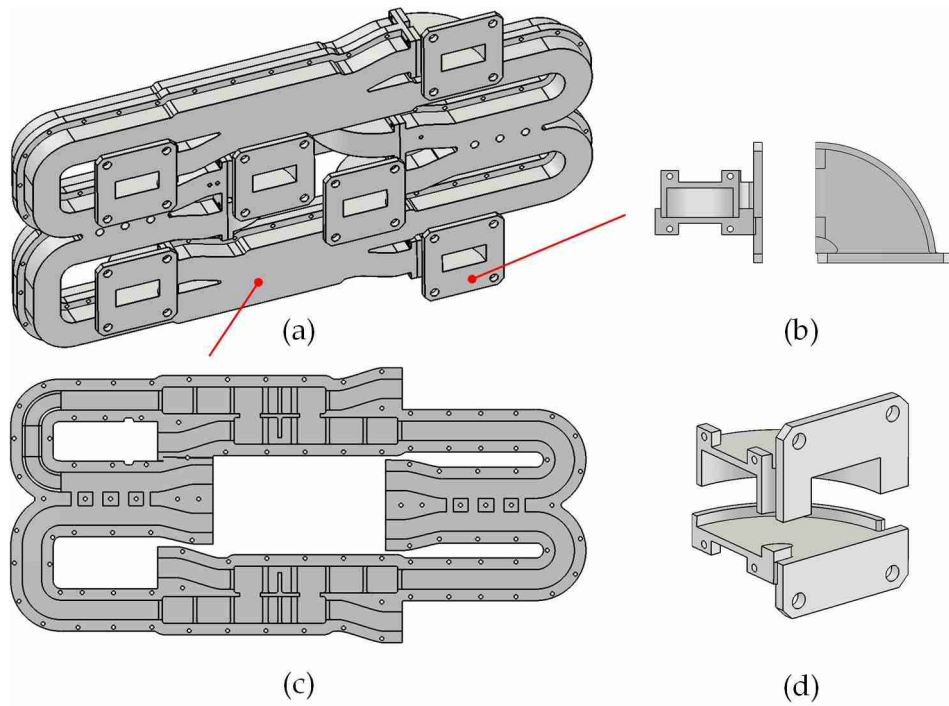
Assembly of the SPJ. (a) Overall view. (b) Side and top view of the bend flange. (c) The main part of the SPJ. (d) Assembly of the bend.
